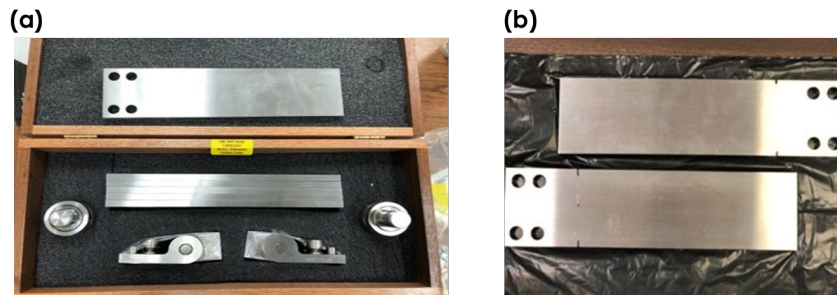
(a) Test fixtures (as received), (b) Loading plates.
